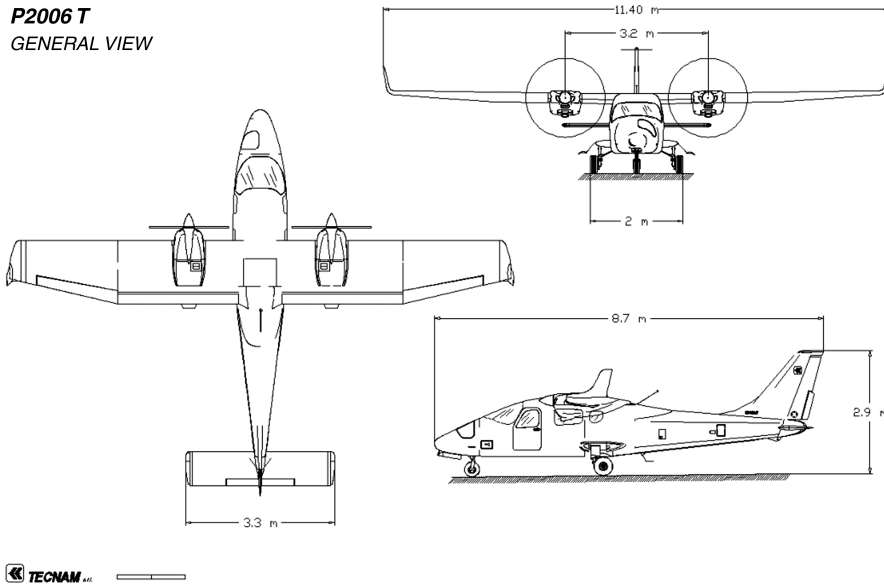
Three-view drawing of P2006T aircraft. (Courtesy of Tecnam.)
